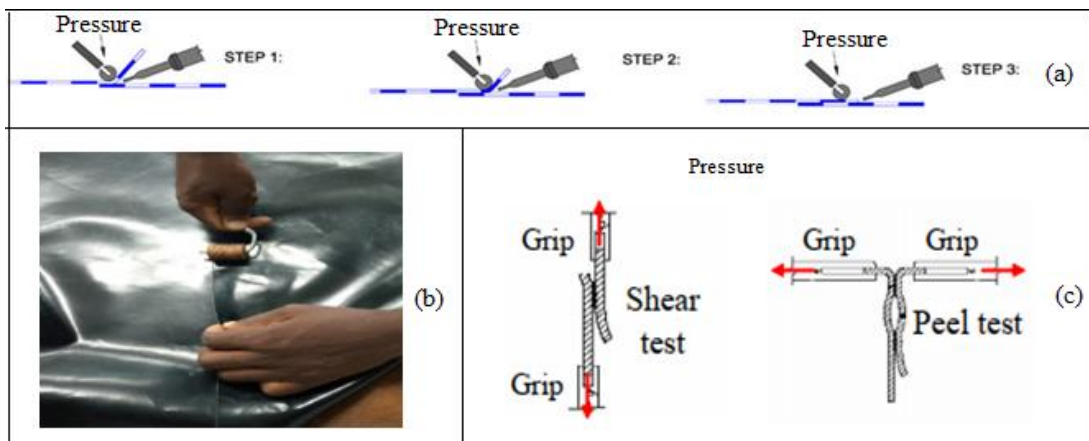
(a); Seam hot air welding process. (b): Jointing Process, (c) Type of test carried out
